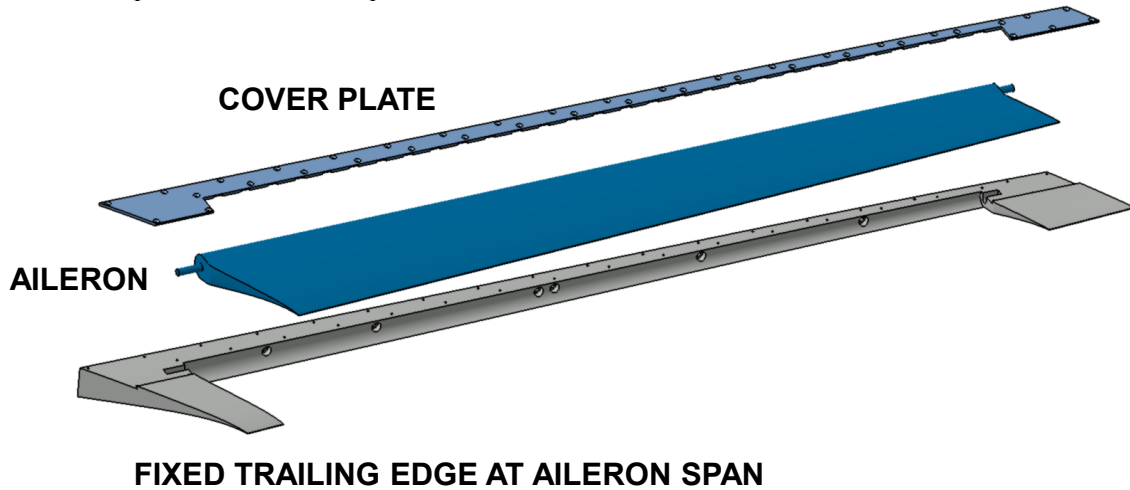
Exploded view of aileron insert for CRM-HL wind tunnel model.
